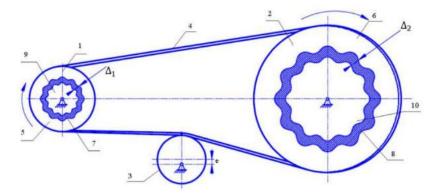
Belt drive diagram with integral pulleys and an eccentric tension roller
